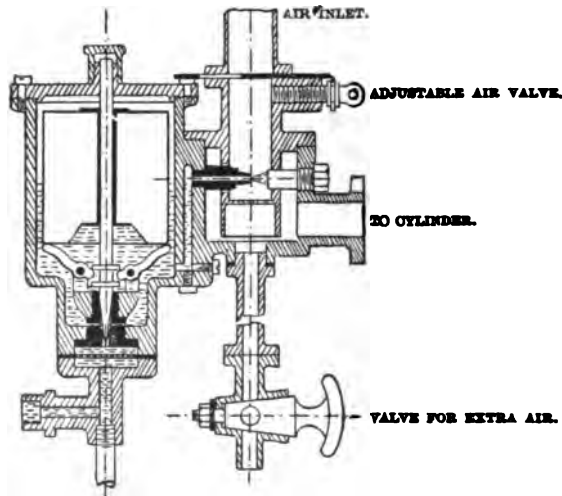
The Peugeot Carburetter. This has many points in common with other carburetters, except that the valve levers are differently arranged; the spraying nozzle at the side of the mixing tube, and the air-inlet from above.
